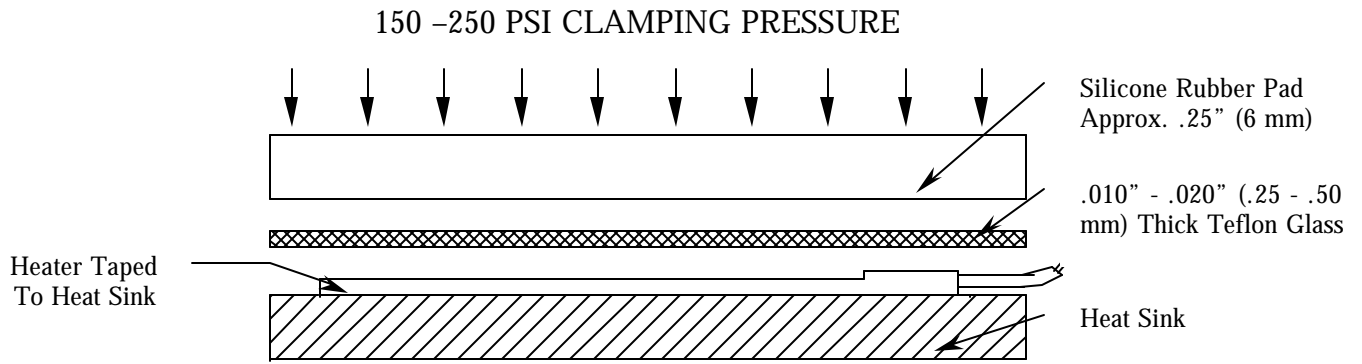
CLAMPING FOR FLAT HEAT SINK
